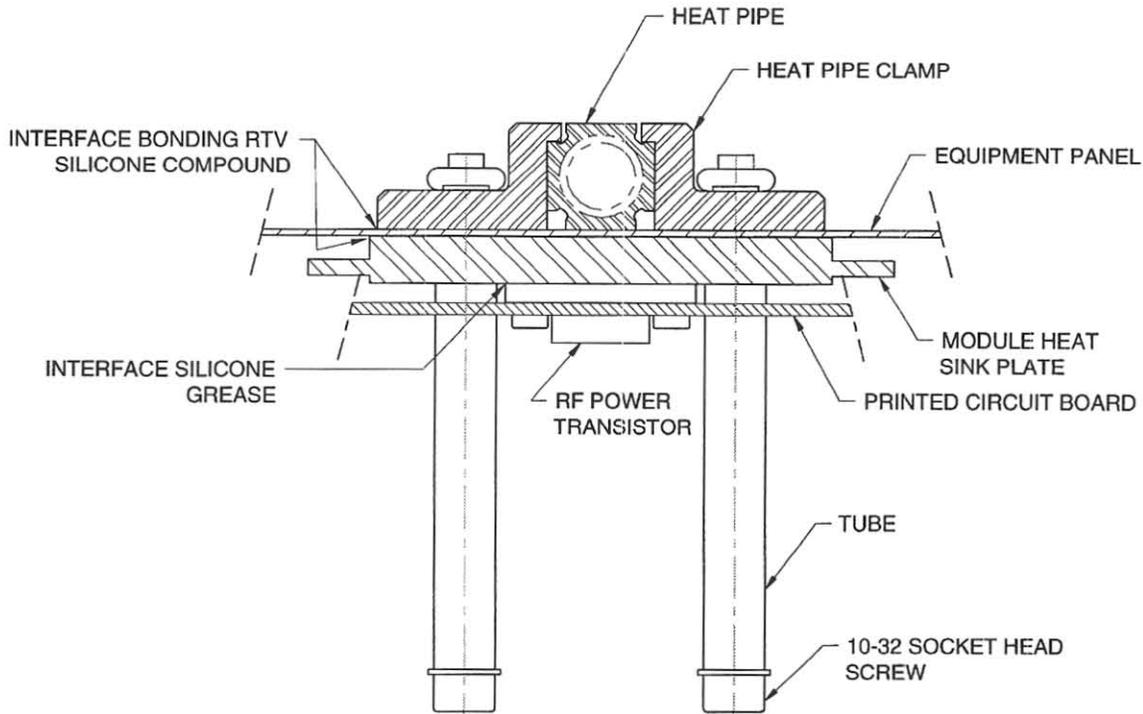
P3D Heat Pipe Clamp & Module Heat Sink Cross Section View
